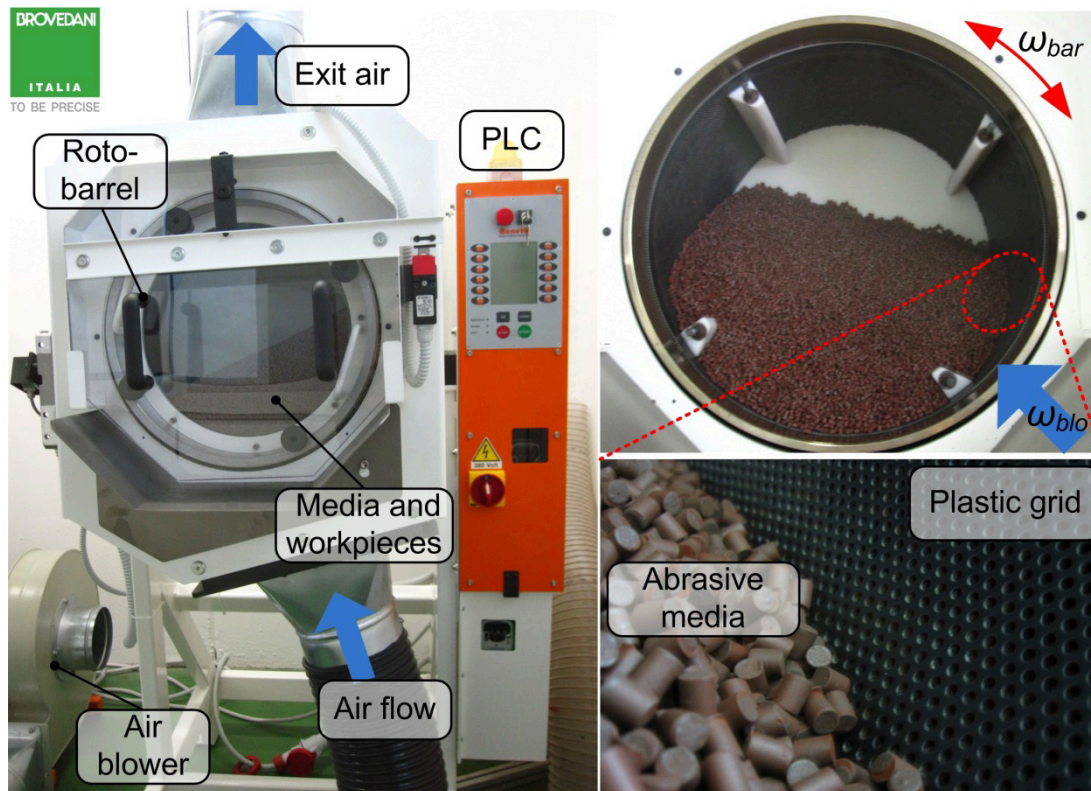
Machine tool for dry deburring and radiusing (courtesy of University of Tor Vergata and Brovedani SpA)
